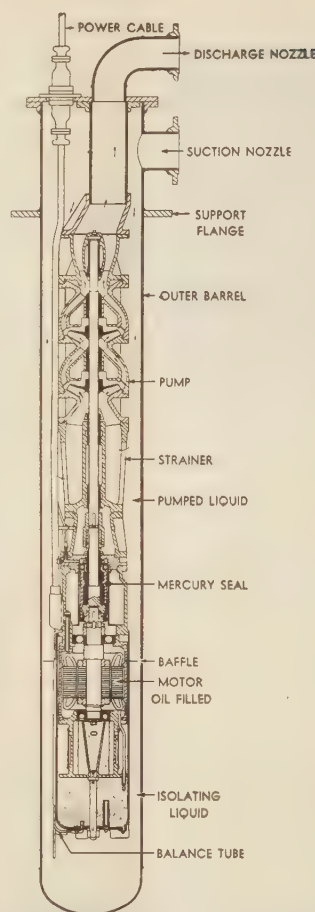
SECTIONAL ELEVATION OF STUFFING-BOXLESS PUMP REVEALS CONSTRUCTION PRINCIPLE AND WORKING ELEMENTS
